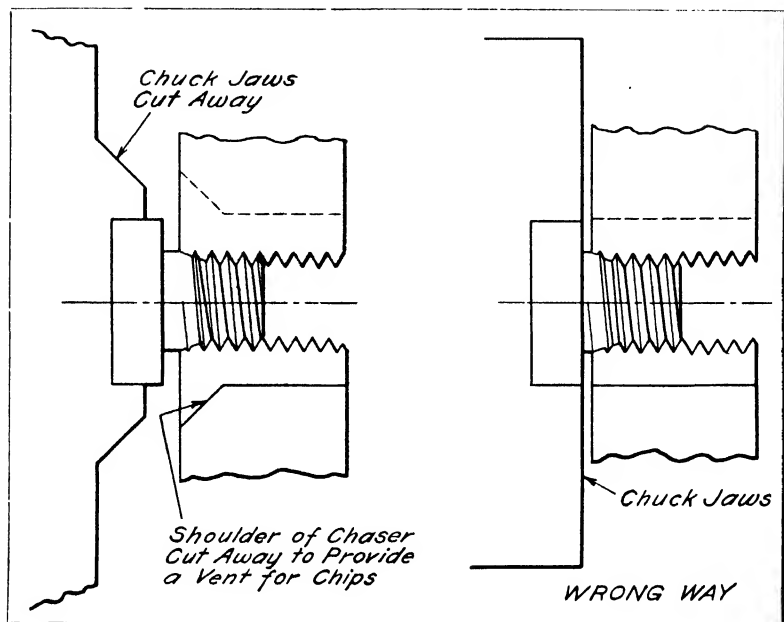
(Left Diagram) Chuck Jaws and Chasers Cut Away to Provide Proper Chip Clearance. (Right Diagram) Lack of Chip Clearance Such as Shown Here often Results in Damaged Chasers
